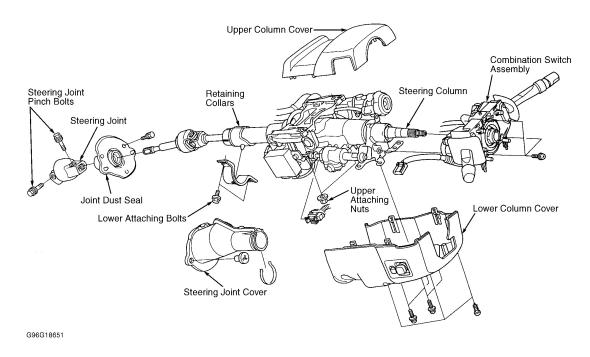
Exploded View Of Steering Column Assembly (3.5RL) Courtesy of AMERICAN HONDA MOTOR CO., INC.
